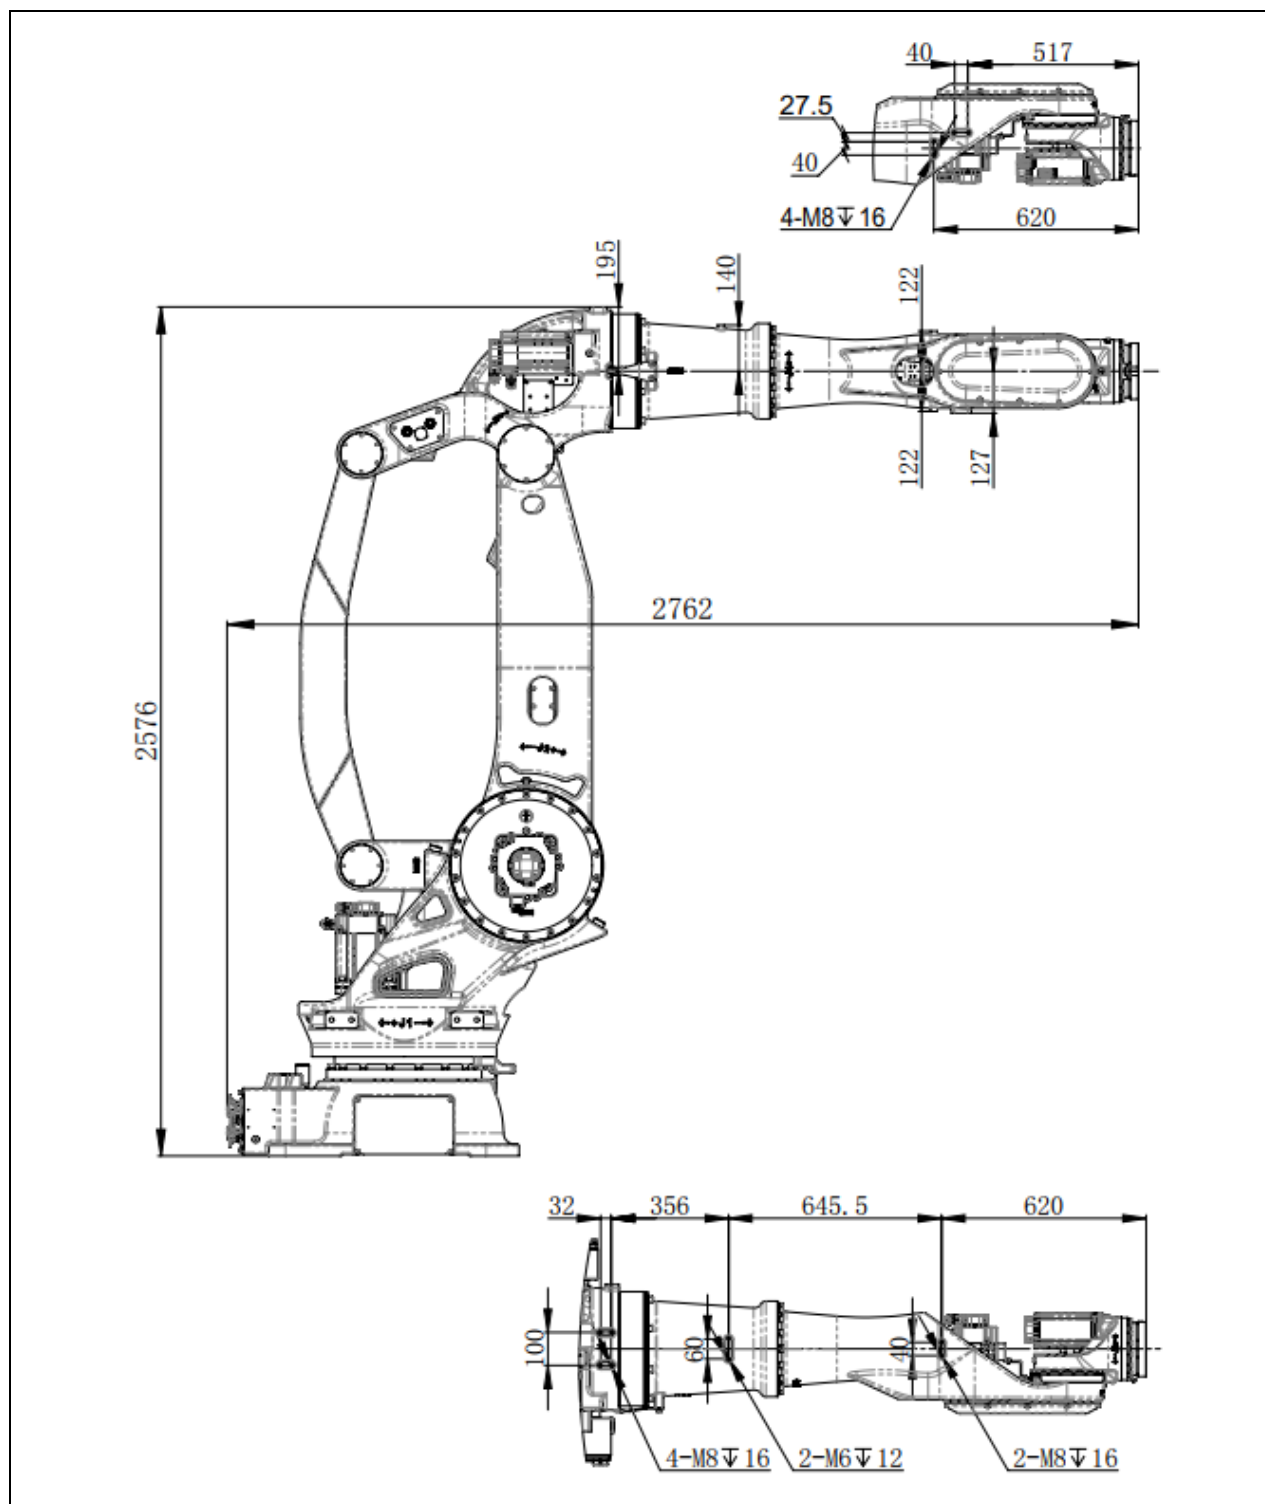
Equipment mounting face (ER220-3200, ER280-3200)
